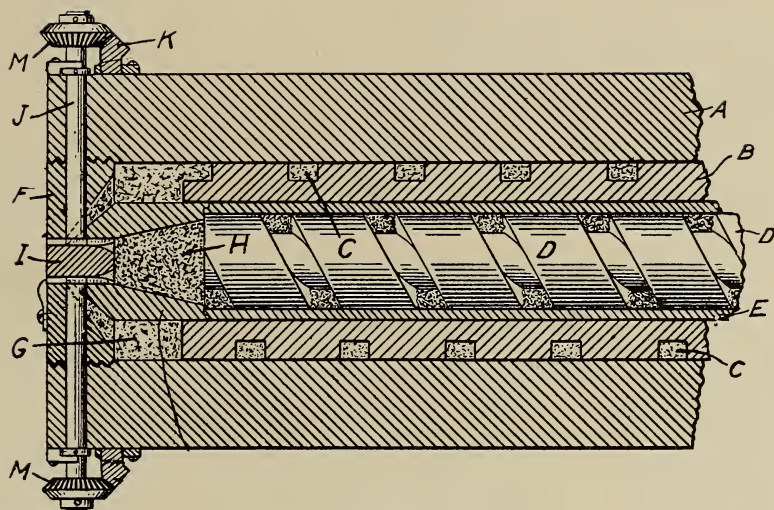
THE MAHONEY STRIPED TUBING MACHINE.
